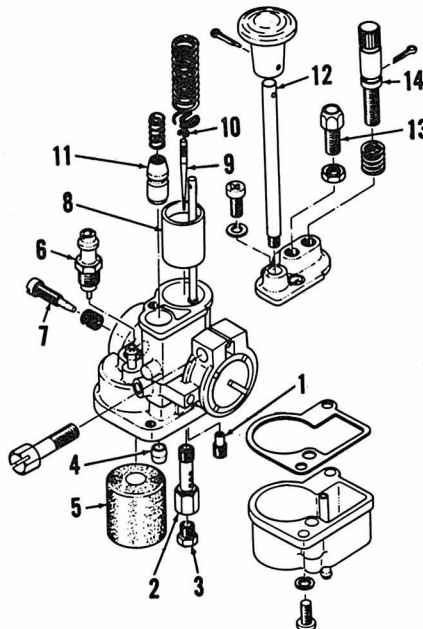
Exploded view of sliding valve carburetor used on the JT-1.
